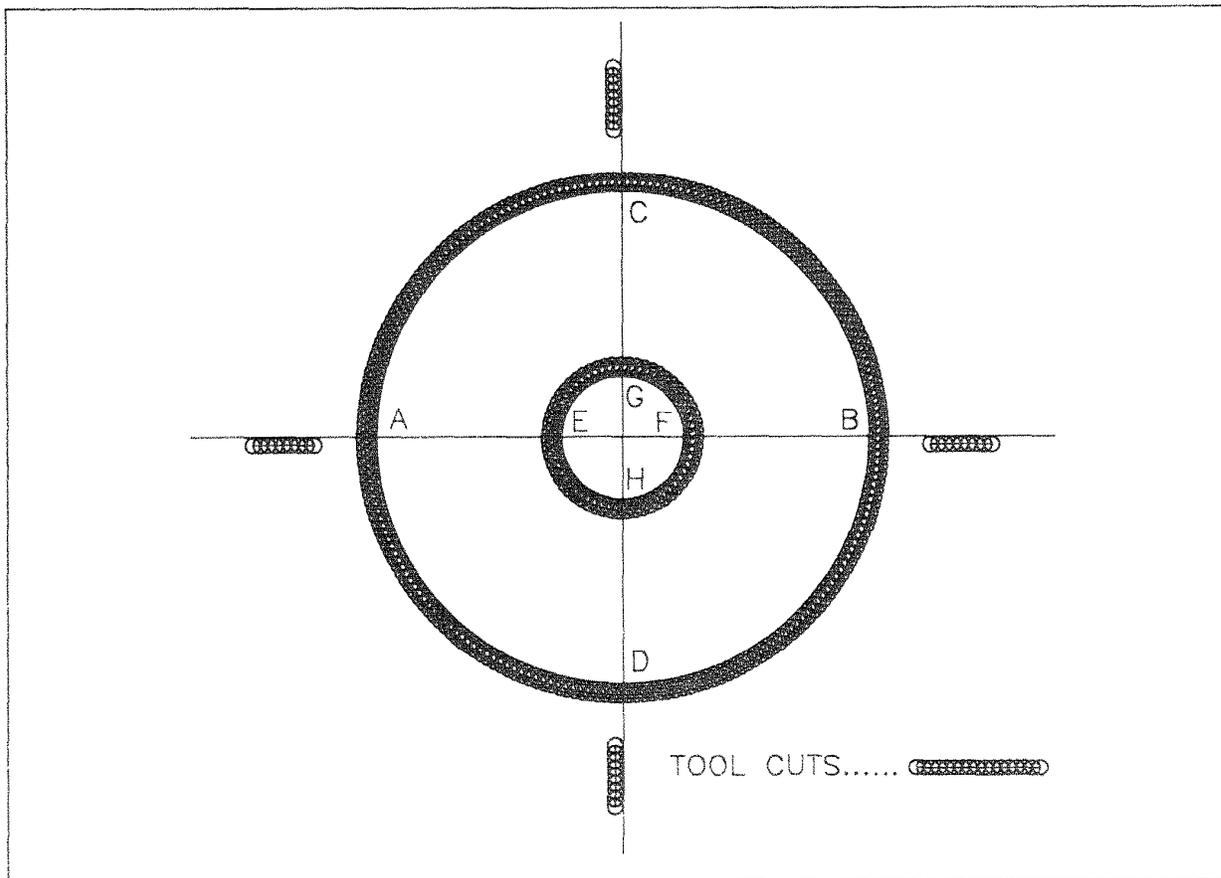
Drawing showing accuracy cuts in acrylic sheet and measurement points for both the 2-inch and 8-inch circles.
